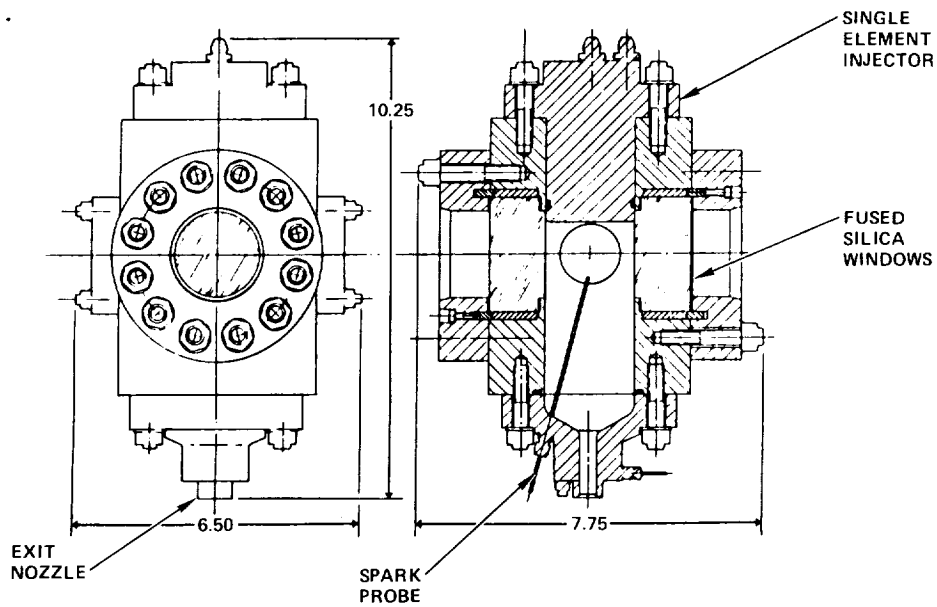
Turbine Drive Combustor Technology Test Chamber
